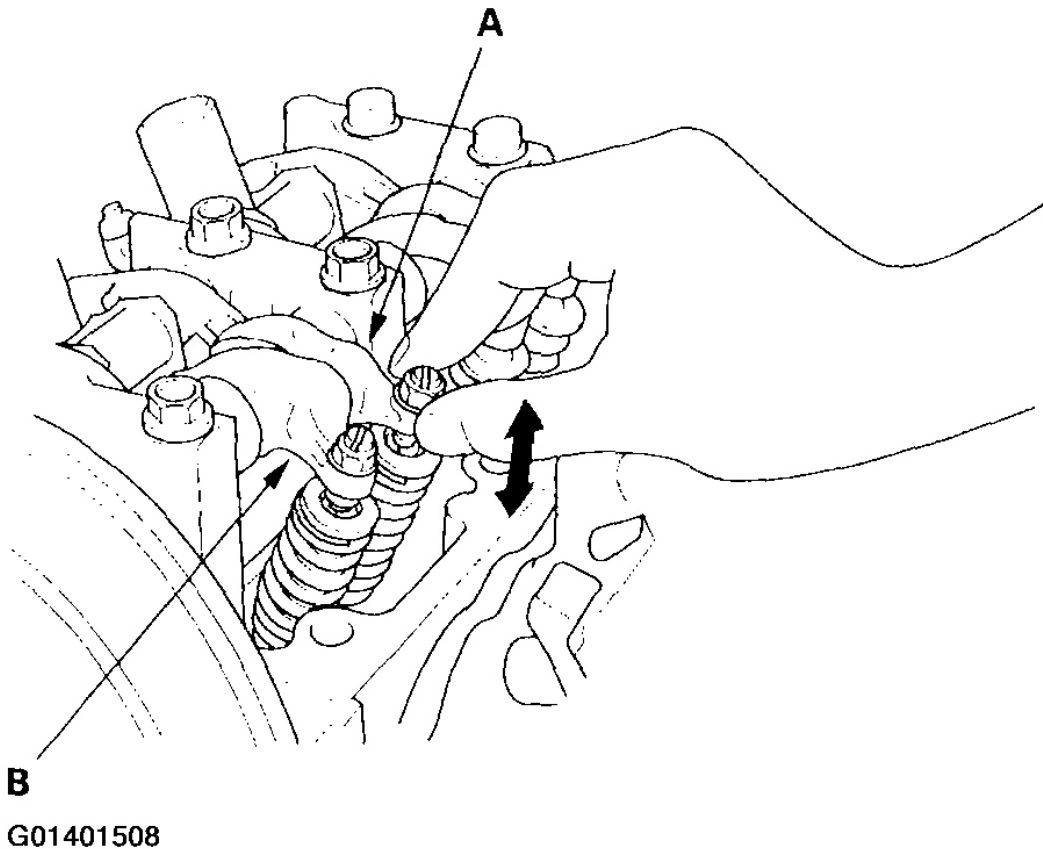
Moving Intake Secondary Rocker Arm For No. 1 Cylinder
